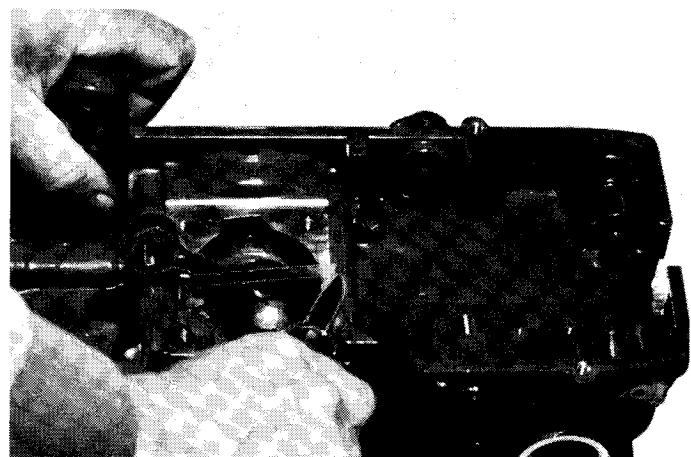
Note that the gasket is to remain in its original condition the whole time. Trim the gasket after assembly.
